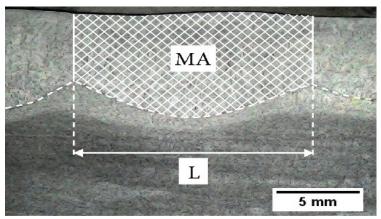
Measurement of the molten area (MA) per unit of weld bead length (L).
